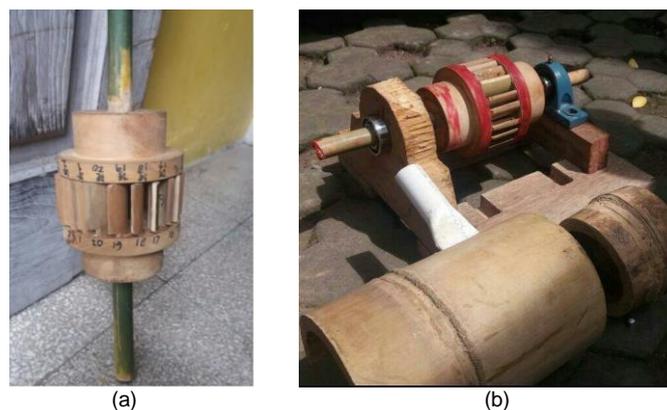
Bamboo turbine: (a) Runner with shaft; (b) Parts of turbine.
